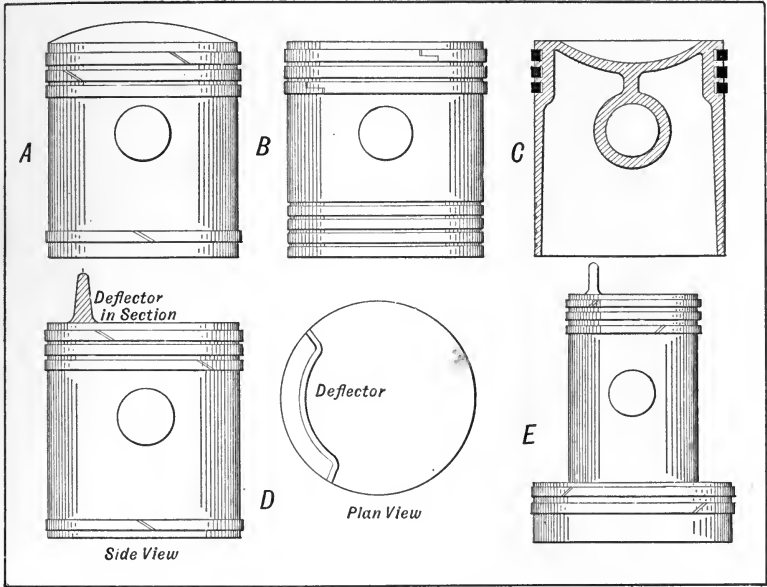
Forms of Pistons Commonly Employed in Gasoline Engines. A—Dome Head Piston with Three Packing Rings. B—Flat Top Form Almost Universally Used. C—Concave Piston Utilized in Knight Motors and Some Having Overhead Valves. D—Two-Cycle Engine Member with Deflector Plate Cast Integrally. E—Differential of Two-Diameter Piston Used in Some Engines Operating on Two-Cycle Principle.
